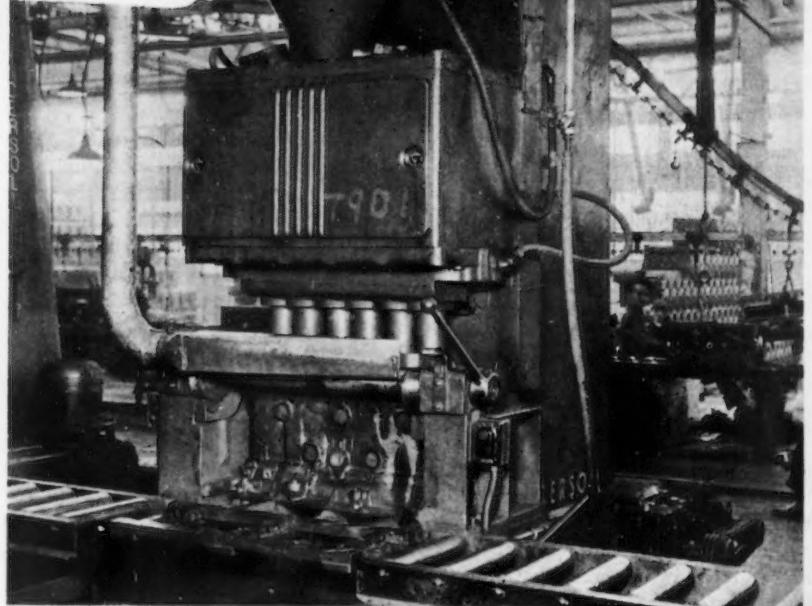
Pneumatic toggle clamps hold the block while the bores are semi-finished. Heavy guide bars steady the hydraulic head which incorporates an extremely long slide with taper shoes and gib for maintained alignment.
